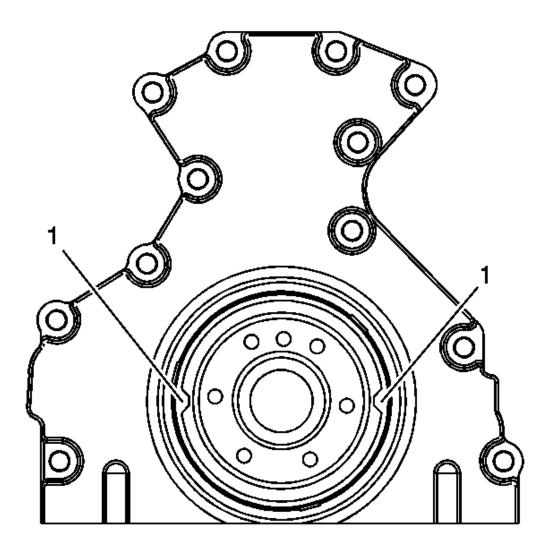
View Of Rear Housing Alignment Tabs Courtesy of GENERAL MOTORS CORP.
